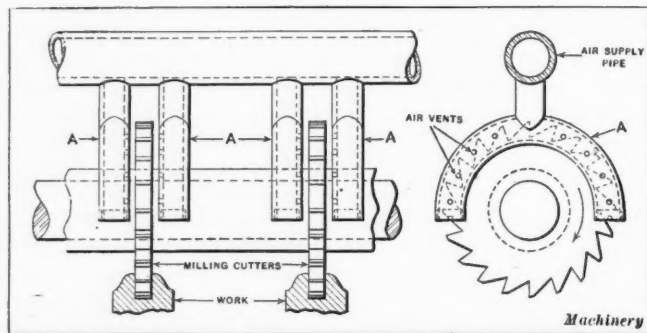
Method of cooling Milling Cutters with Compressed Air
